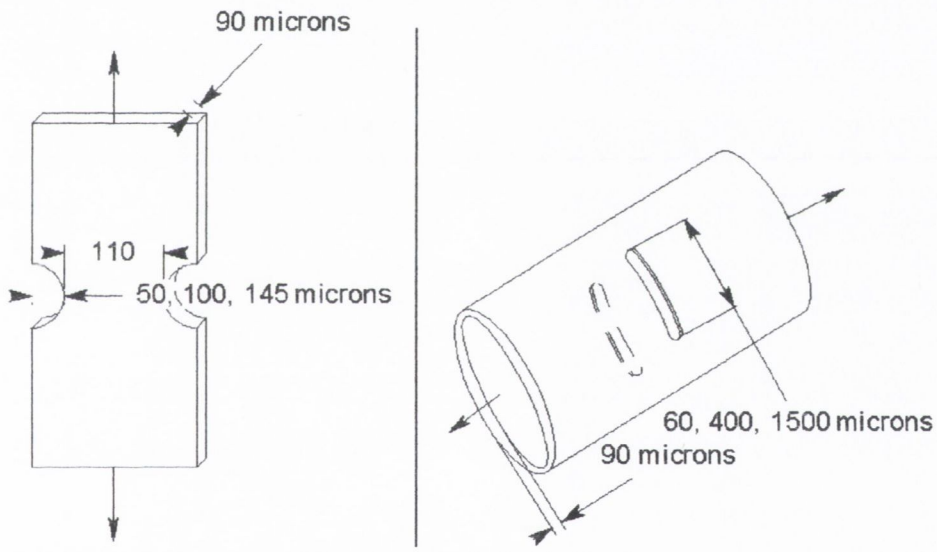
Specimen geometries microscopic 316L stainless steel specimens
